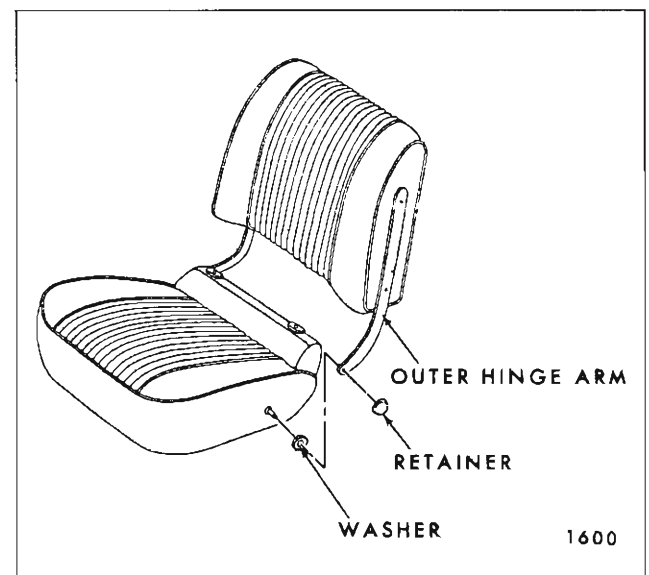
H19—Bucket Seat Back Removal - "A" Styles
